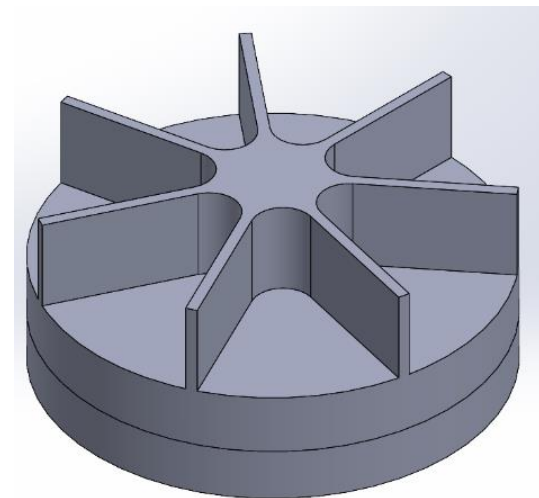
Optional Workpiece to be machined in Super Duplex SAF 2507.
